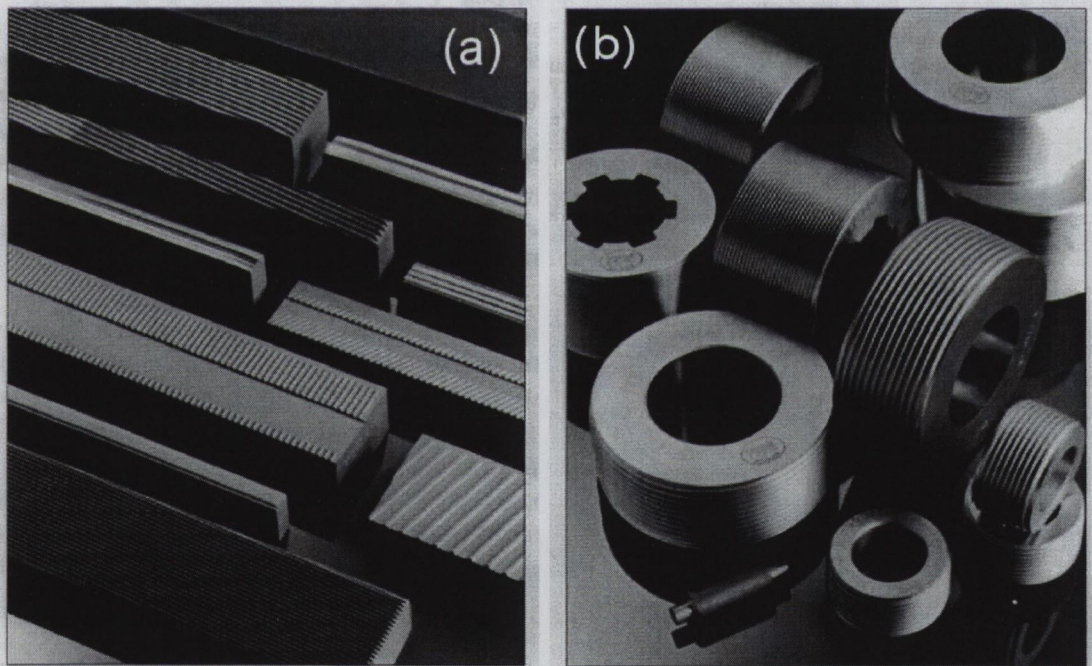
A Selection of Flat (a) & Cylindrical (b) Thread Rolling Dies
